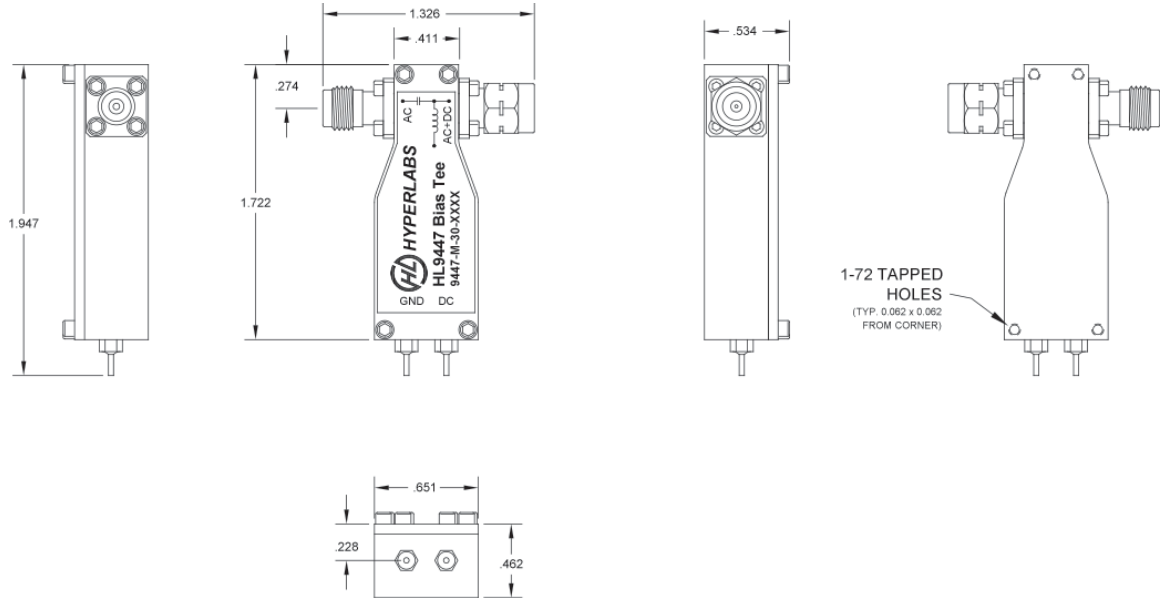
HL9447 with DC bias pins Mechanical Drawing
